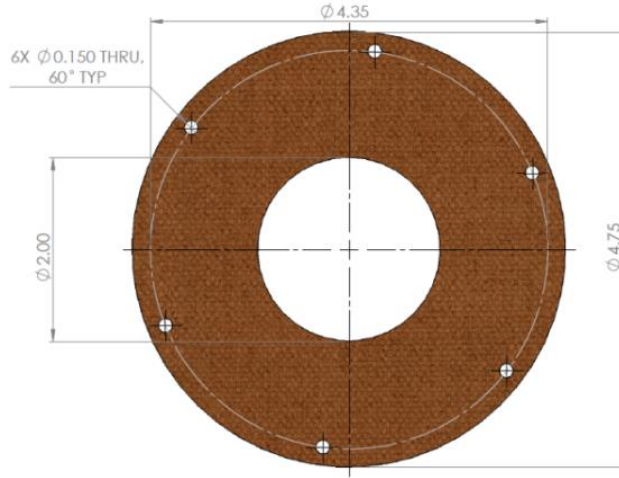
Dimensional drawing of a single circular metal mesh layer for a metal mesh thrust foil bearing.
